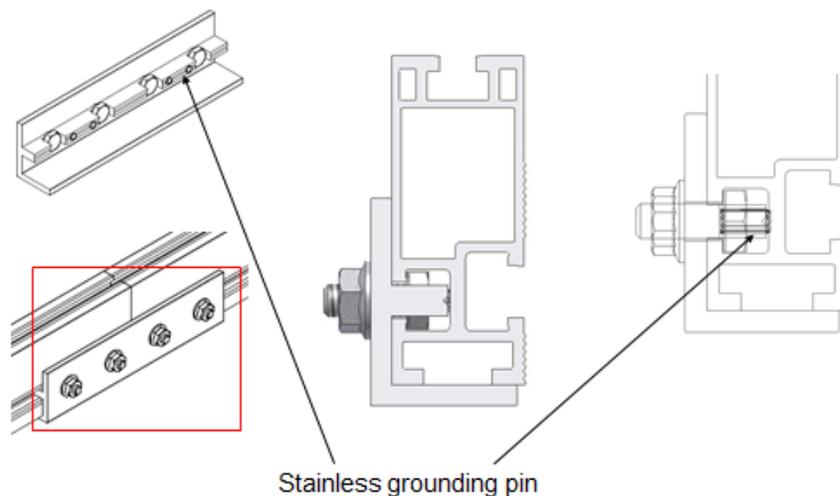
A 4 bolt version of the self-grounding splice can be installed to join rail sections together.
